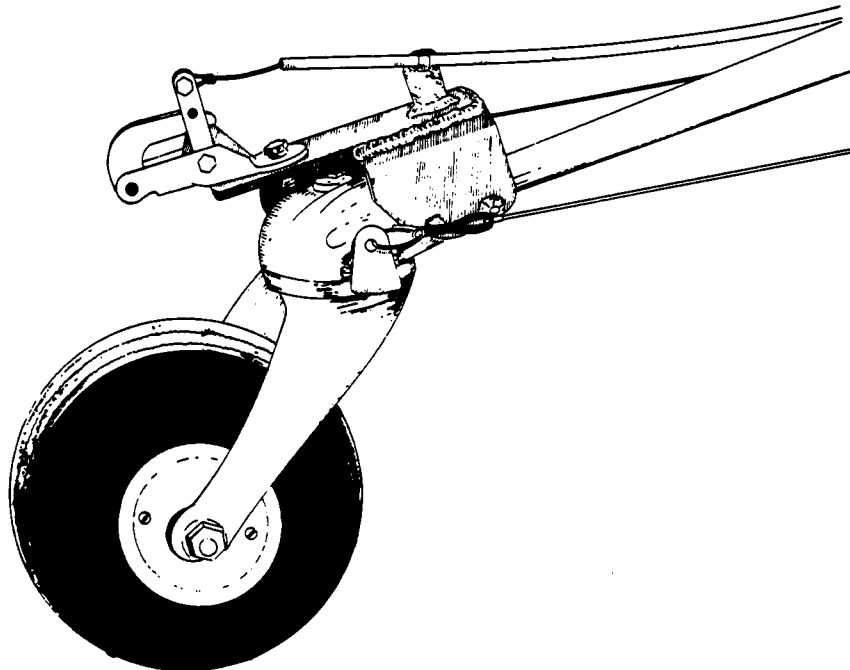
Conventional gear aircraft—tubular spring type tailwheel.
